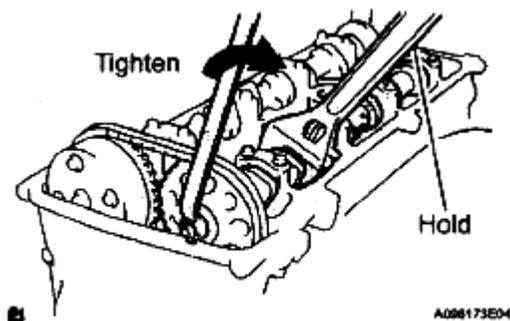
Tightening Camshaft Timing Sprocket Set Bolt
